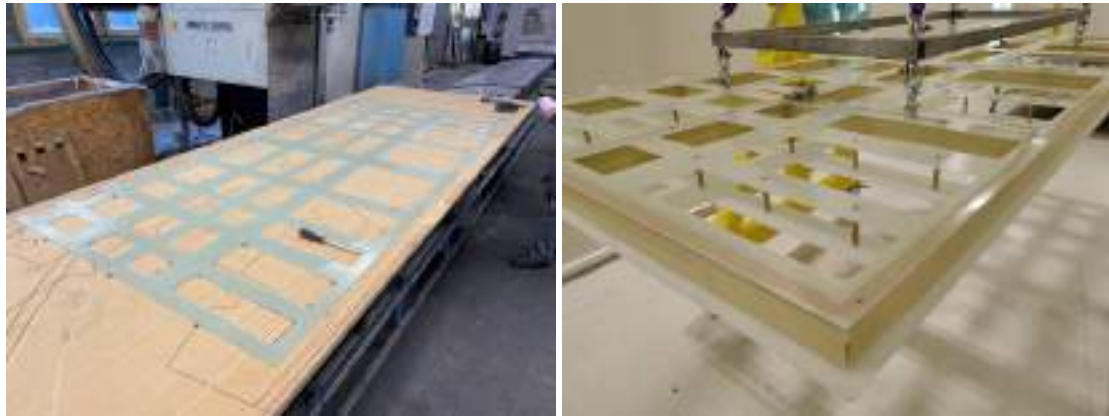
Left: one glass-epoxy skin after being machined and before being glued to FRP profiles. Right: the final composite frame after its construction, showing G10 rods used in place of profiles in several locations.
